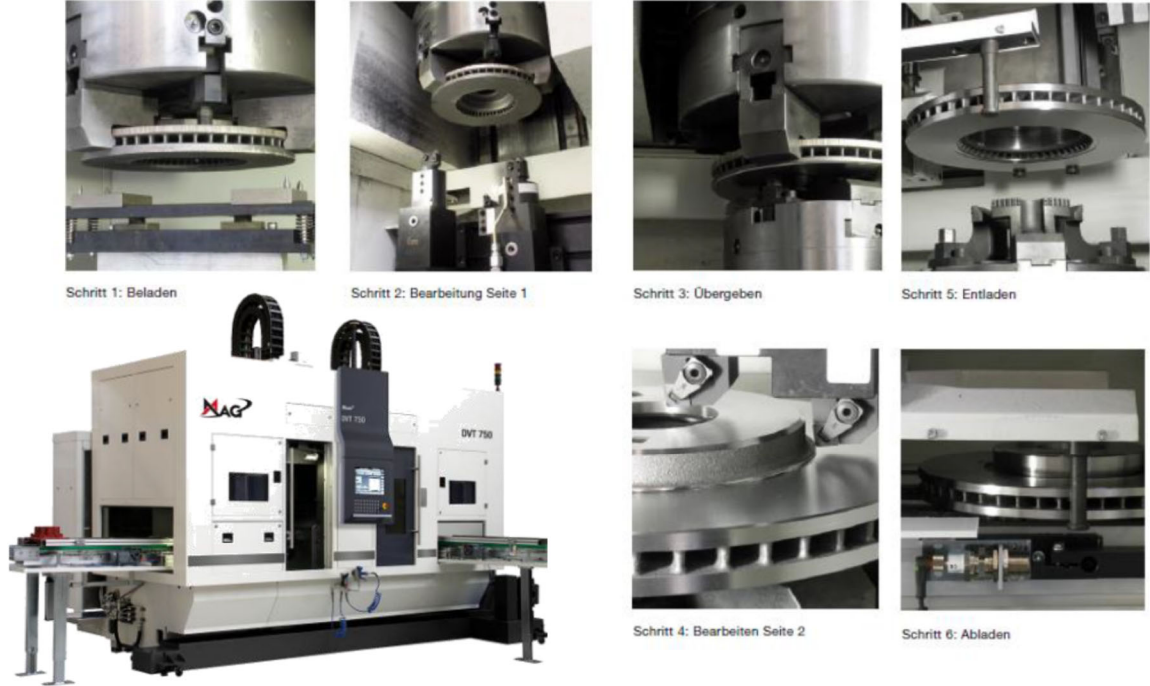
The unbeatable machine and processing concept of the HESSAPP DVT 750
